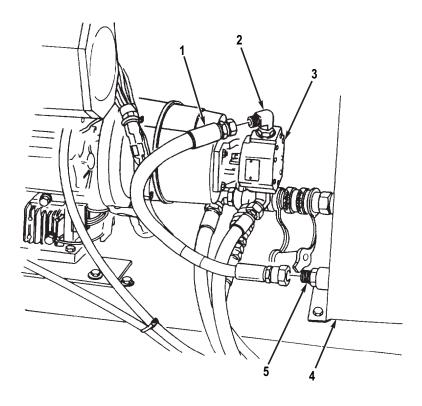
Hydraulic Reservoir Outlet-to-Hydraulic Pump Inlet Hose Disconnection.
